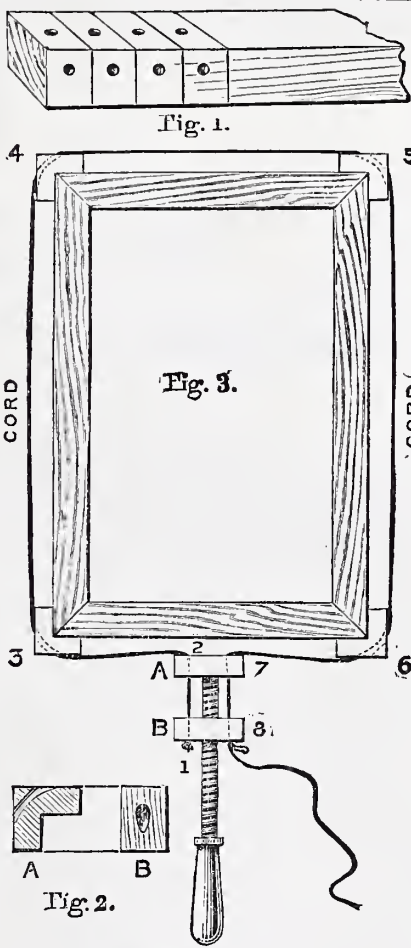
Take a square piece out of the corner of each (A, Fig. 2), and shape the holes so that a cord will pass through easily (B, Fig. 2). Then you require a wooden screw, which you can get from any turner or joiner for a few pence, if you cannot make one for yourself. Fig. 3, I think, will explain itself. A is a piece of 1/2-in. birch 2 in. by 1 1/2 in. In the centre there is a hole half-way through, into which the point of the screw fits, and on either side there is a hole for the cord to pass through. B is a piece of the same size which forms the nut of the screw, having two holes for the cord as in the other piece. Now get a piece of strong cord (not too thick), put a knot on one end, and pass it through the holes, beginning at 1 and finishing at 8. Glue your mitres, and lay the frame in position on a table; place one of the little blocks on each corner, keeping the screw at the side next you; then draw the cord tight, and put a running knot at 8, Fig. 3; then screw up, being careful to notice that your mitres are all fitting in properly. The frame must now be
